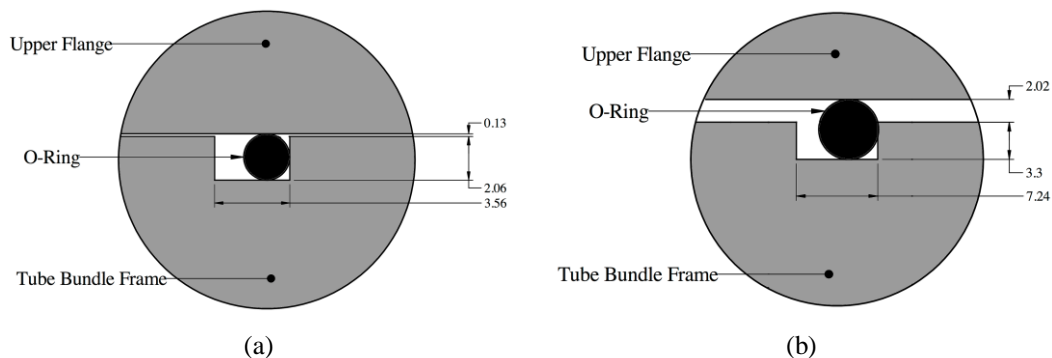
Test section O-ring design clearance details: (a) original, (b) modified (dimensions in mm).
